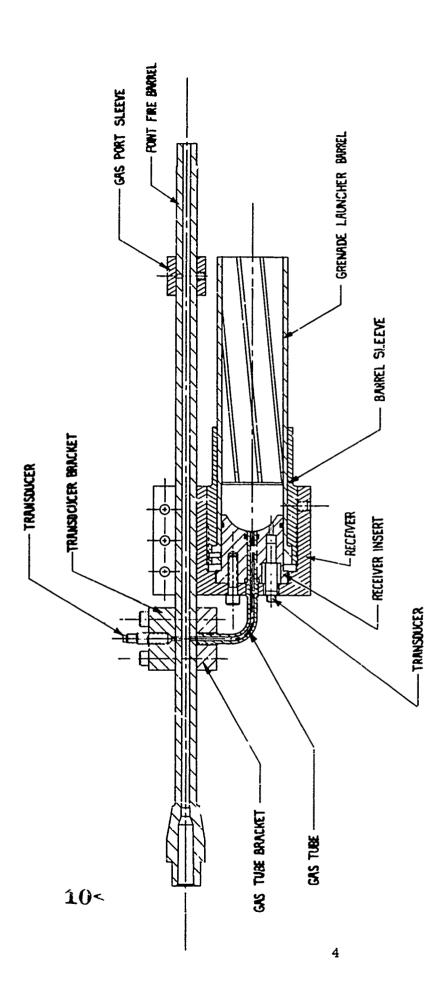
Cross Sectional View of Gas-Launched Firing Fixture
